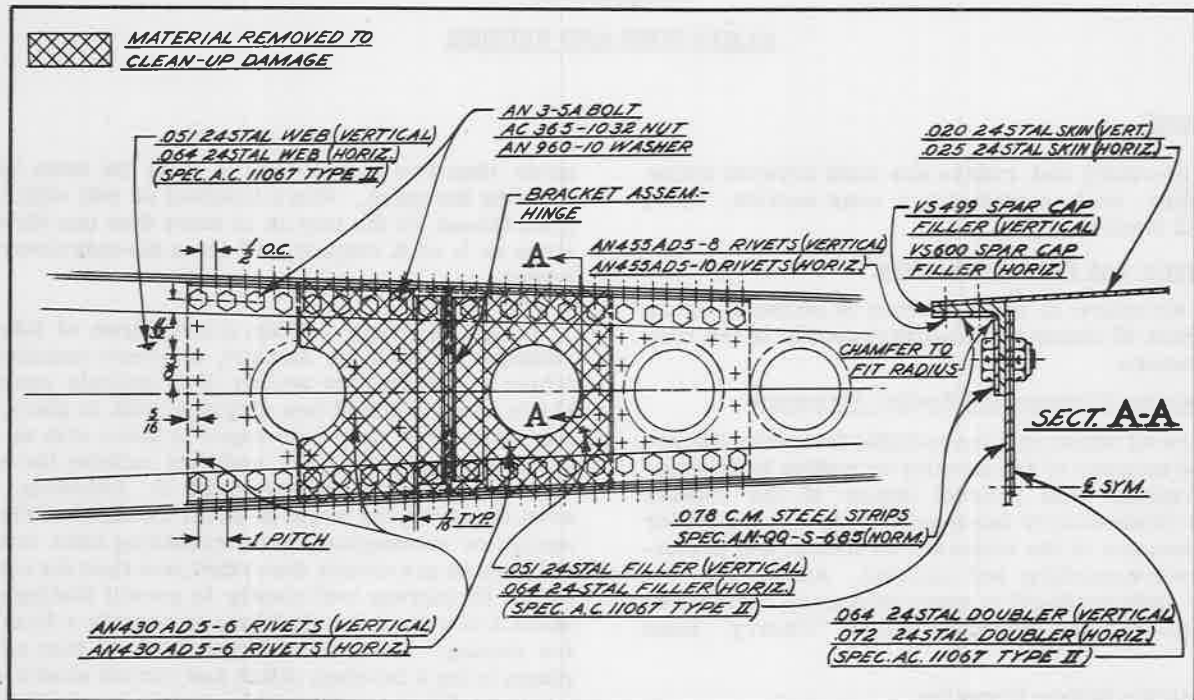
Horizontal and Vertical Stabilizer Spar Repair
